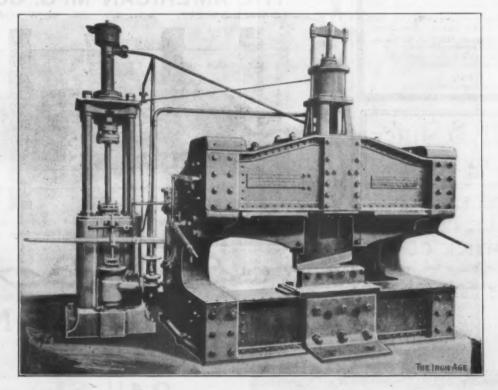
Double Steam Hydraulic Plate Shear, Built by Breuer, Schumacher & Co., Kalk, Germany.
